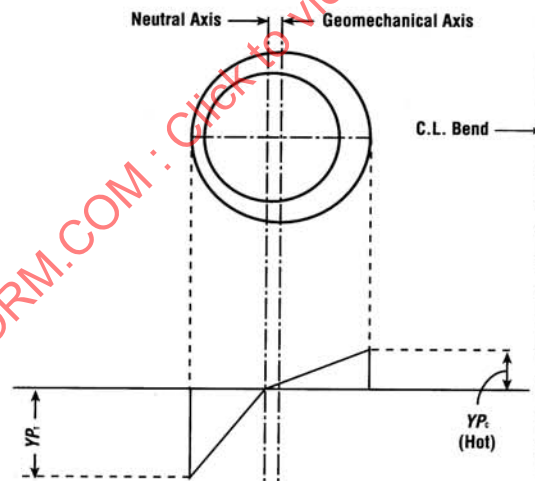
Tubing Cross Sections With Heated Tube and/or Tools
